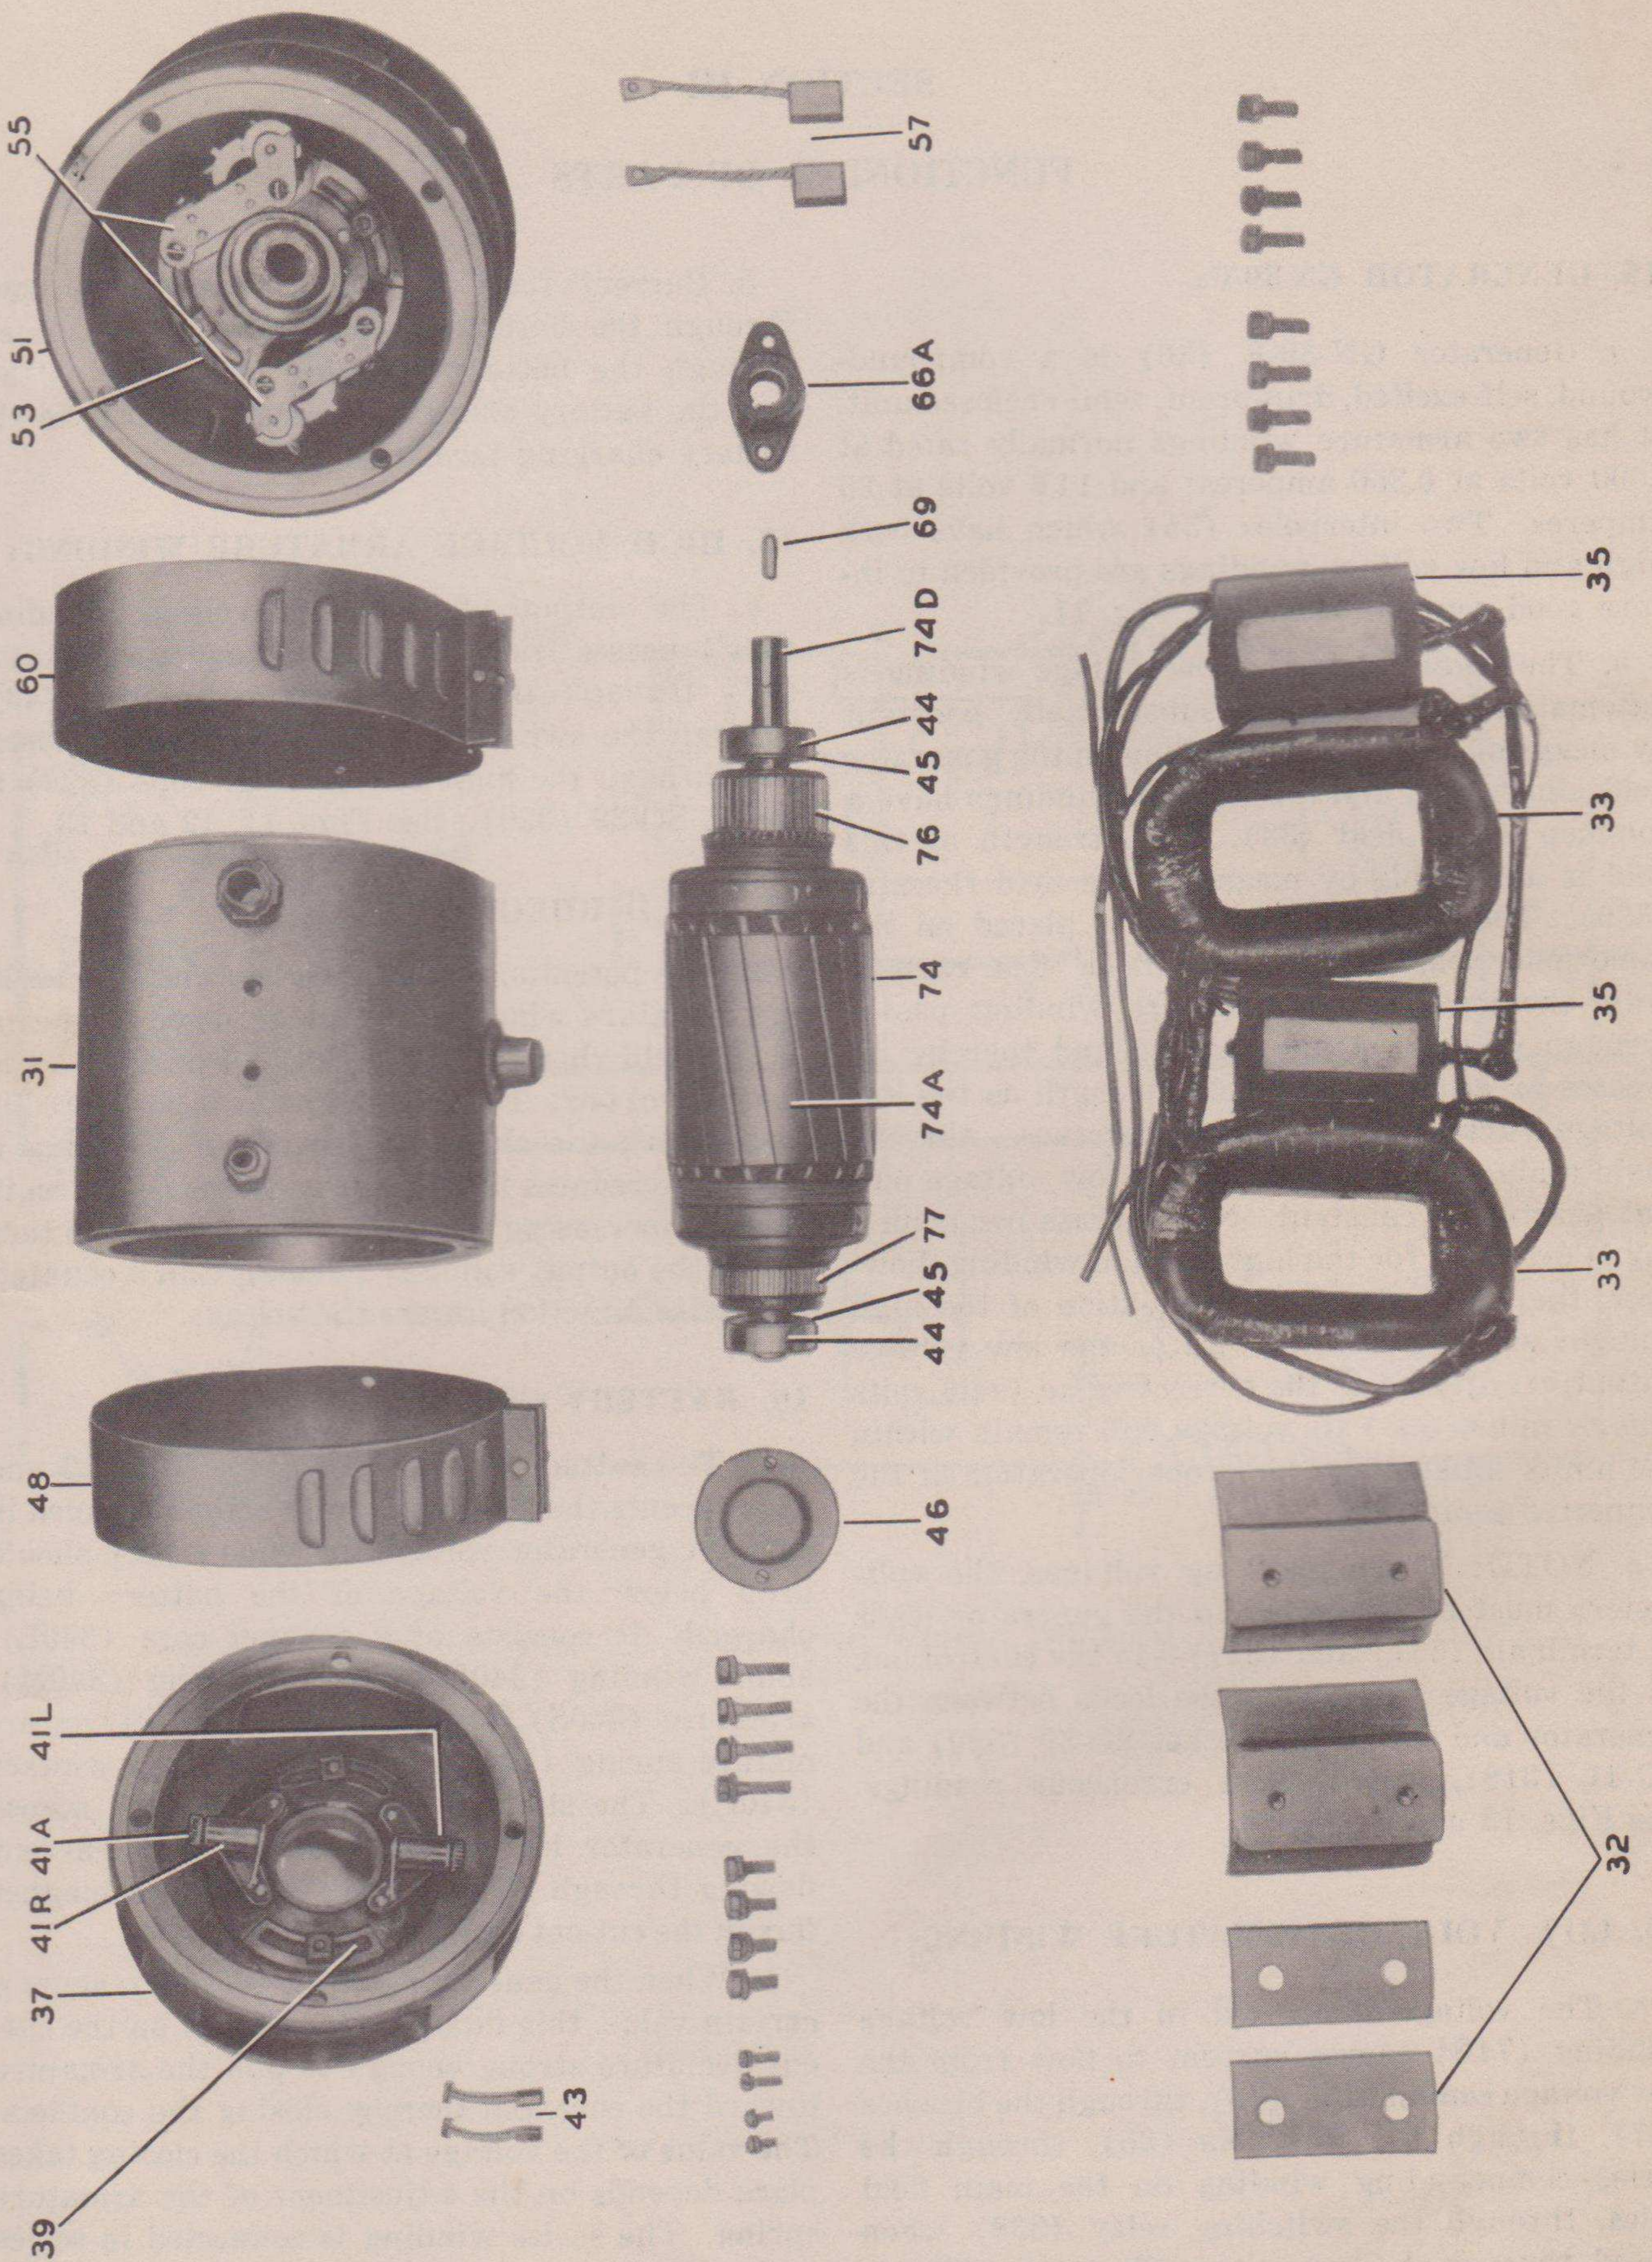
GENERATOR GN-39-F—DISASSEMBLED
